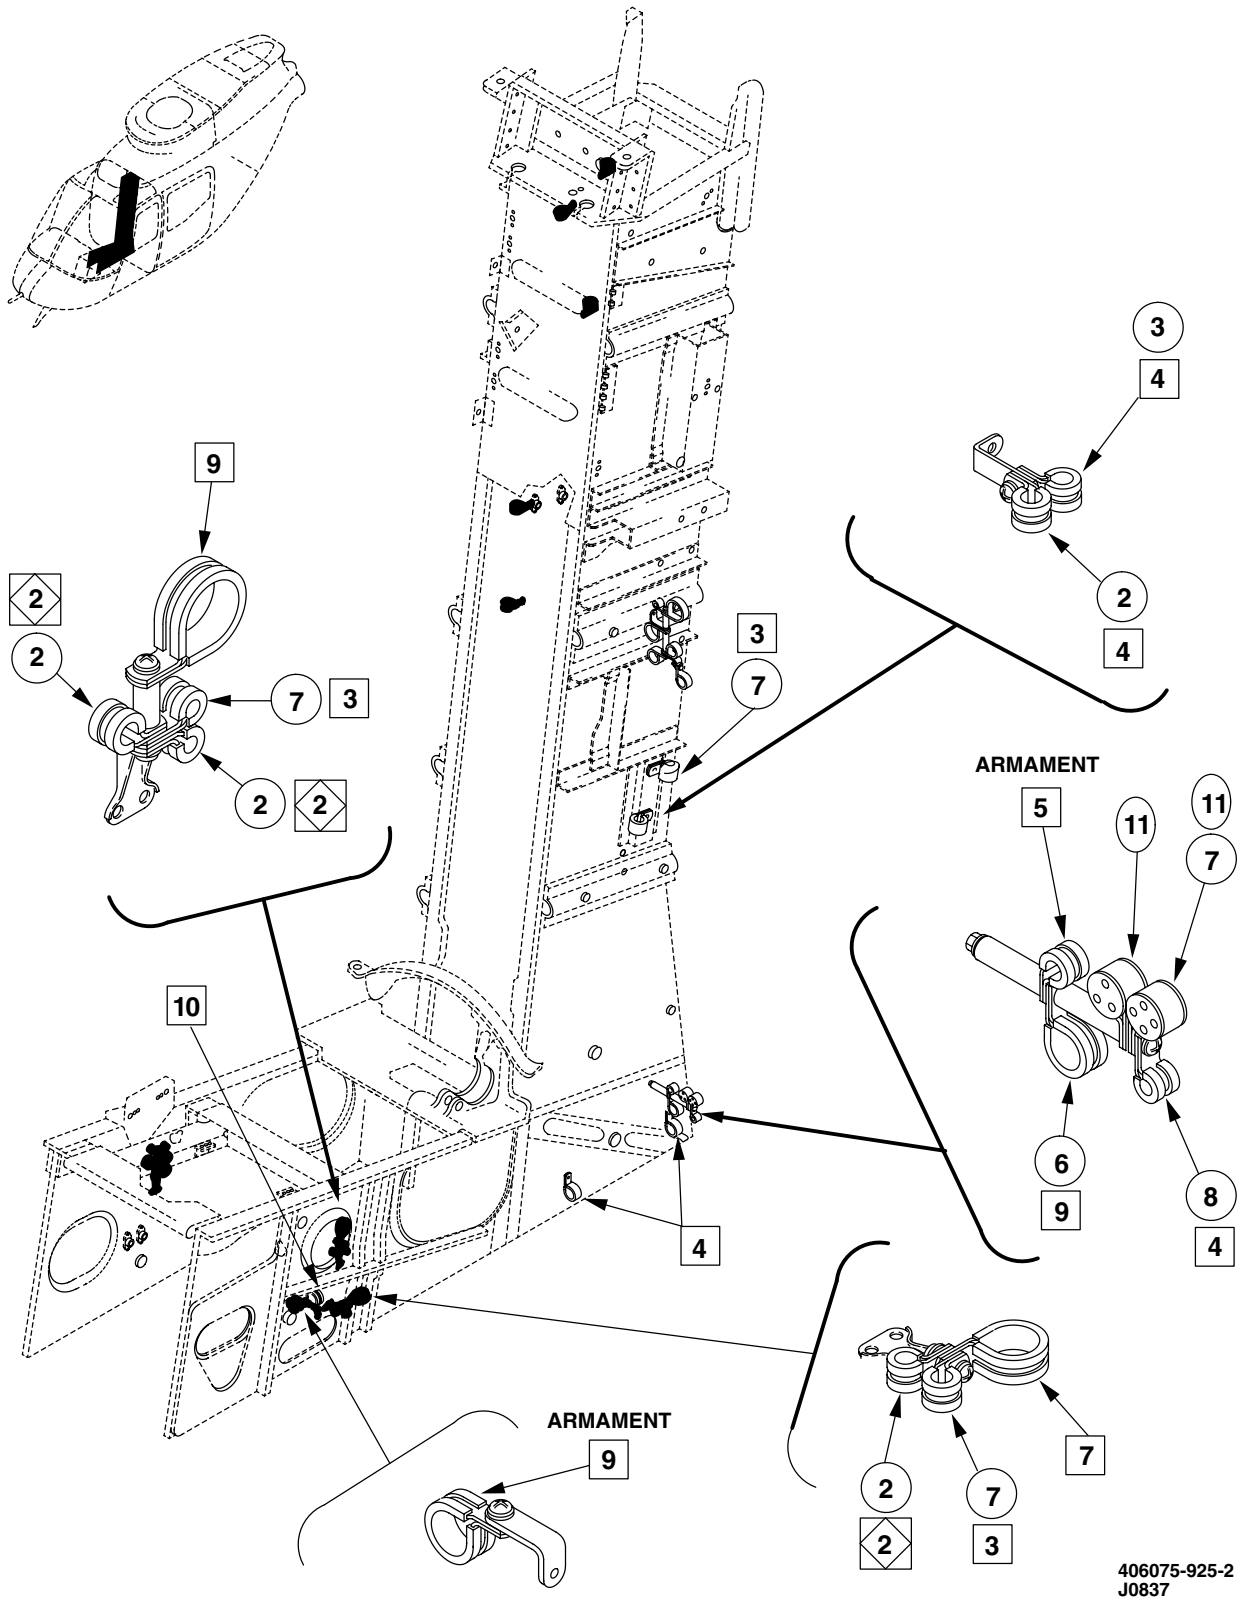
Nose Section Electrical Clamping and Routing (Sheet 9 of 9)
